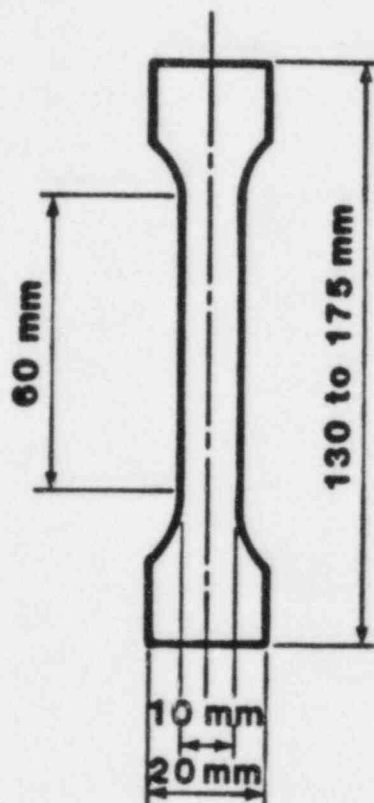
Dimensions for 82 H5 and 82 H6 ISO Dumbbell Samples
